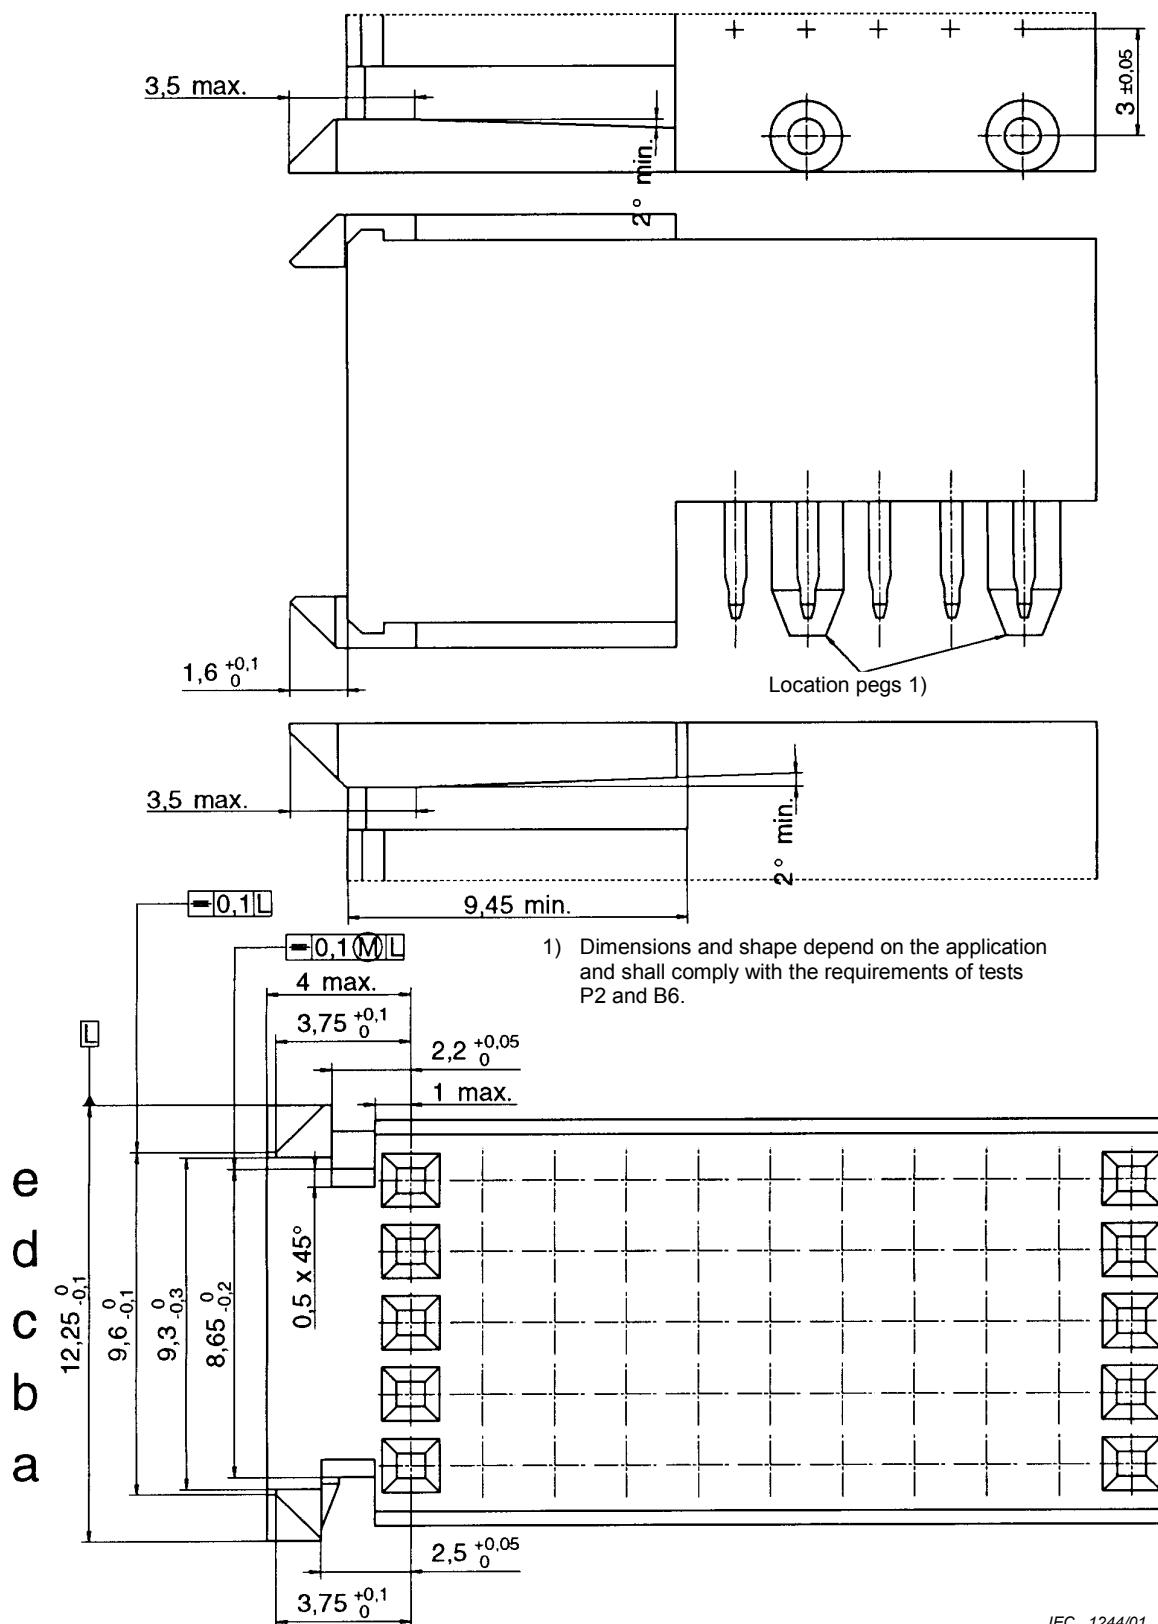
Dimensions of style C, free 25 mm extension module (five rows)
